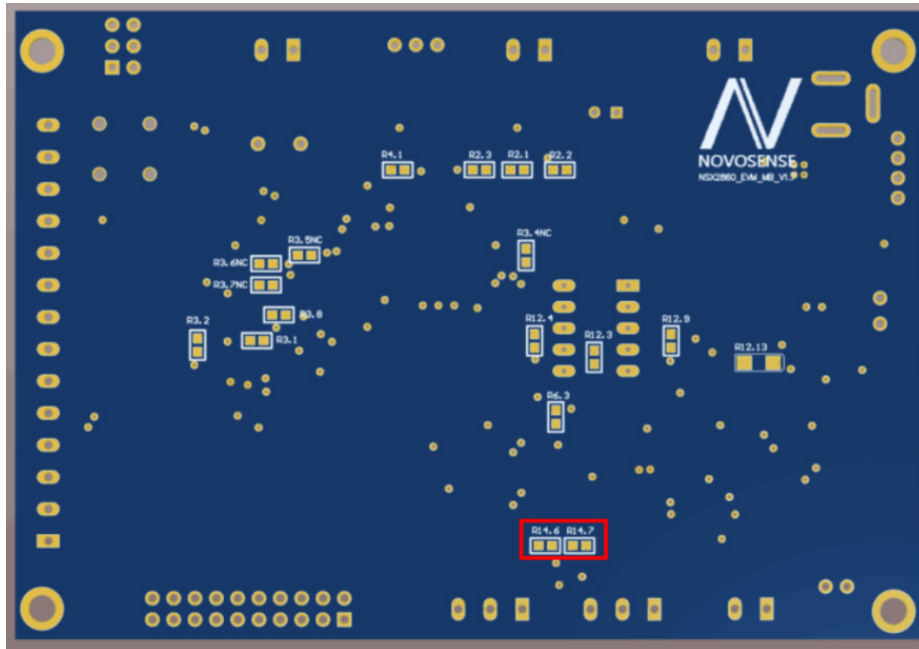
NSx2860(X)/9260(X) EVA board Bottom Side
